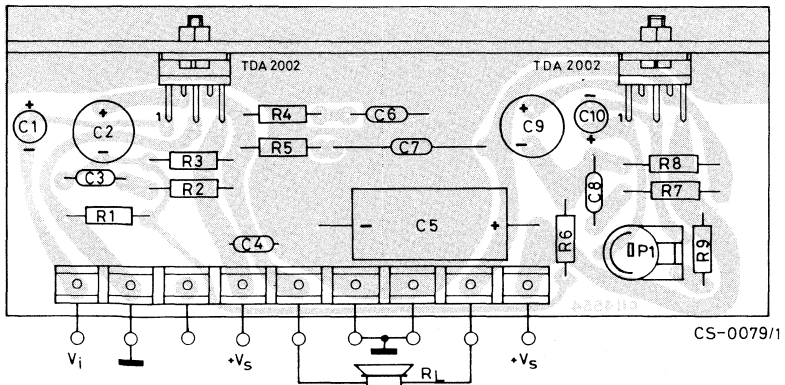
P.C. board and component layout for the circuit of fig. 20 (1:1 scale)
